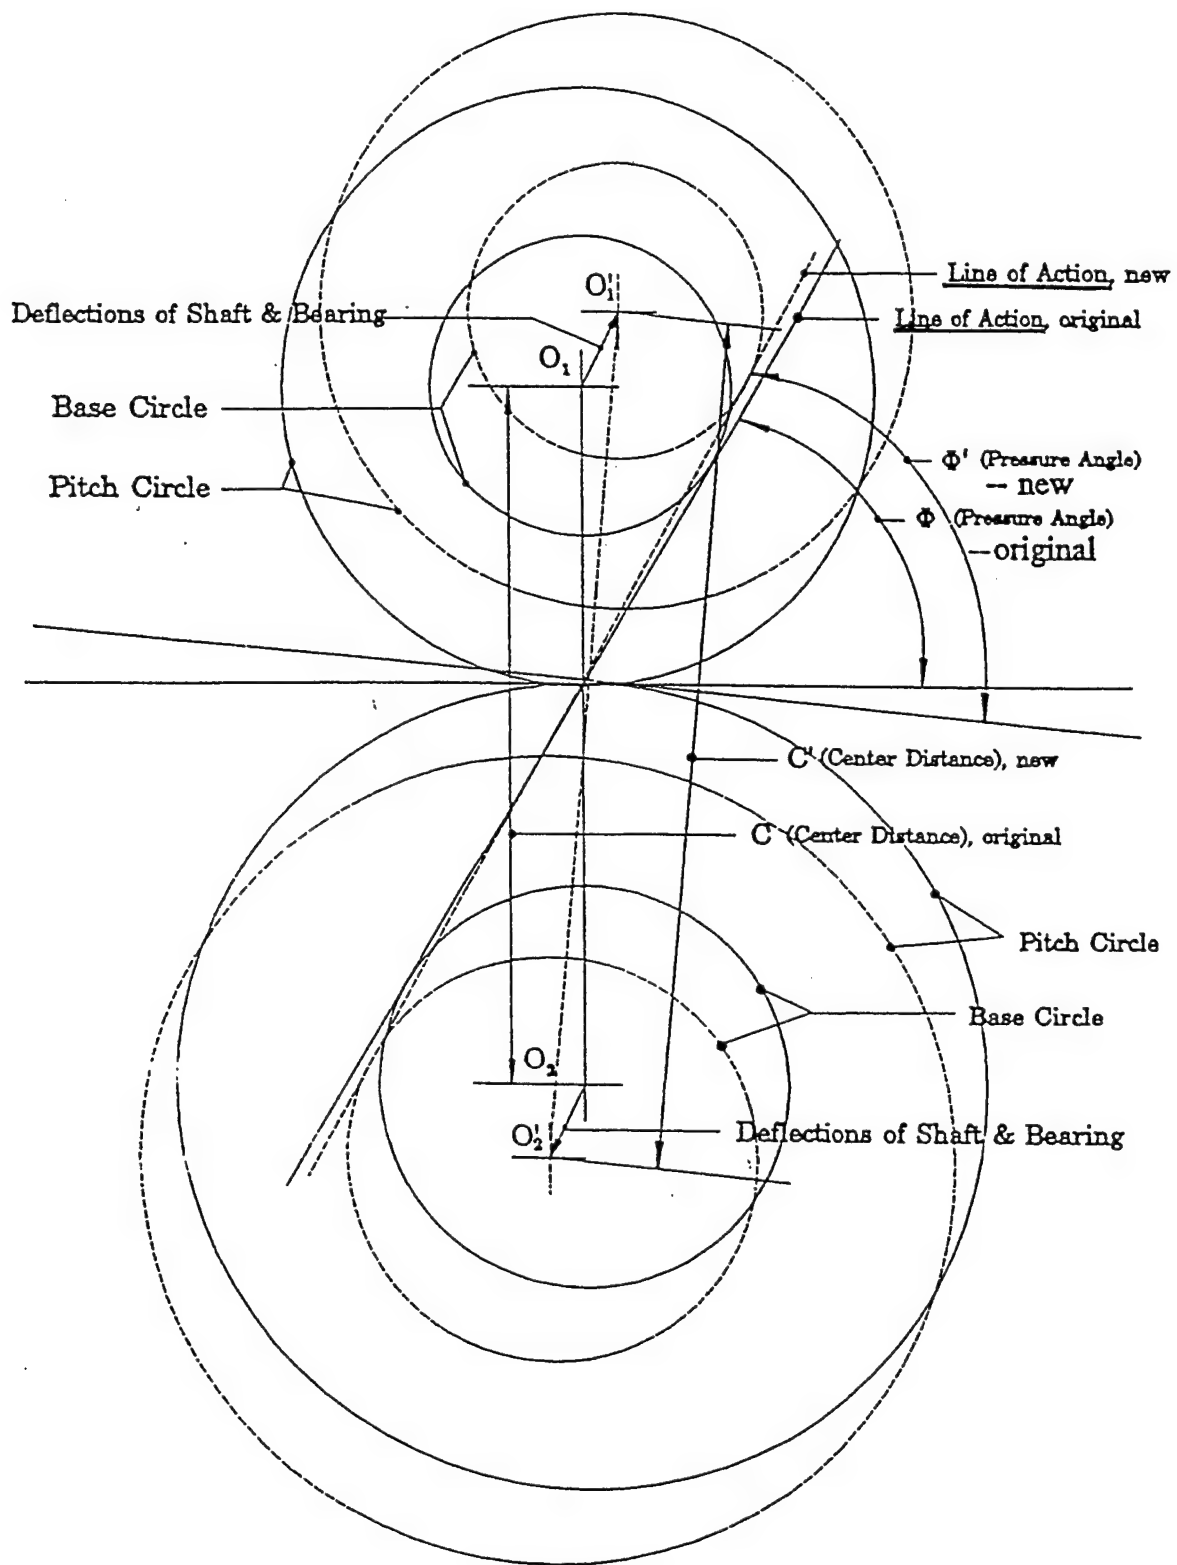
Shifting of center of gear rotation with deflections of shaft and bearing
